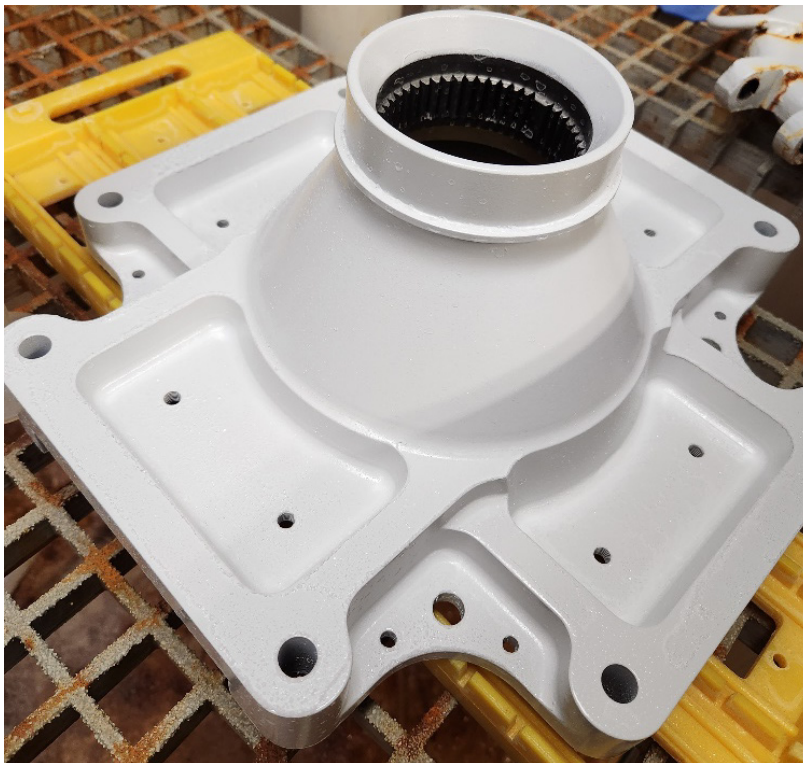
UH-60 tail rotor gearbox at 1008 h (ASTM B117).
